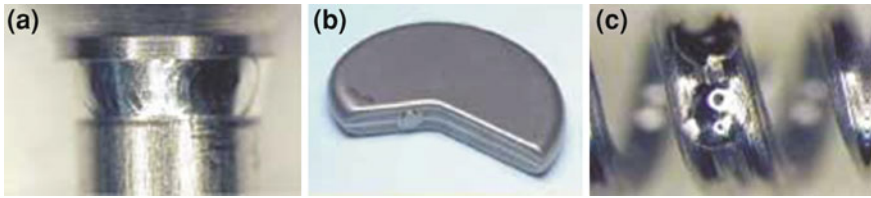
Laser welded medical devices. a End effect tools welded to tube body, b hermetically sealed implant, and c spot welding on catheter coil for stent or balloon placing [64]
